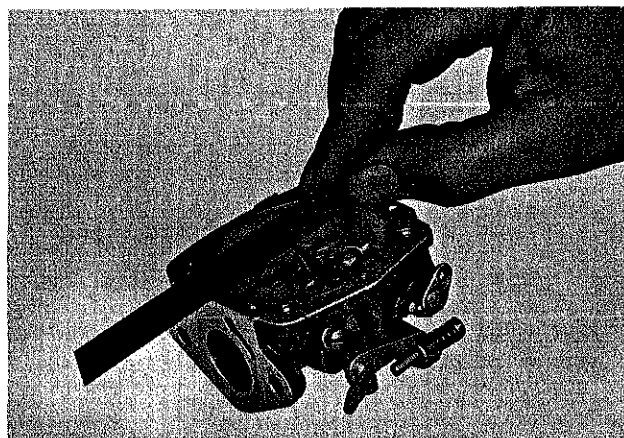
The position of the inlet control lever on McCulloch carburetors is checked by a straight edge laid across the diaphragm mounting face.
